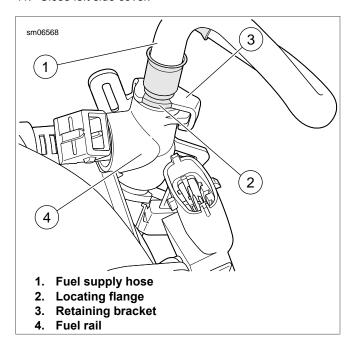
Mounting Fuel Hose and Fuel Rail: XL Models
